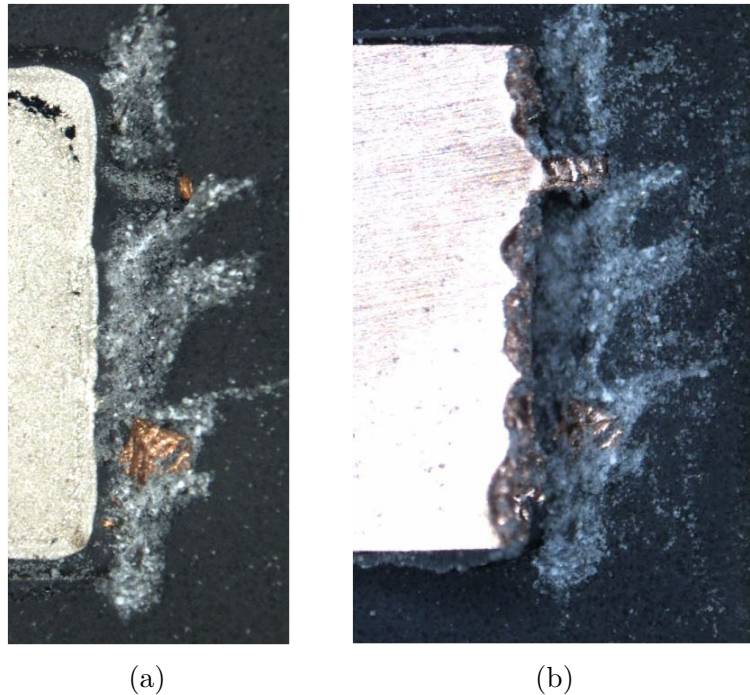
(a) Damage to mould-side of peel, (b) Damage to die pad after peel.
